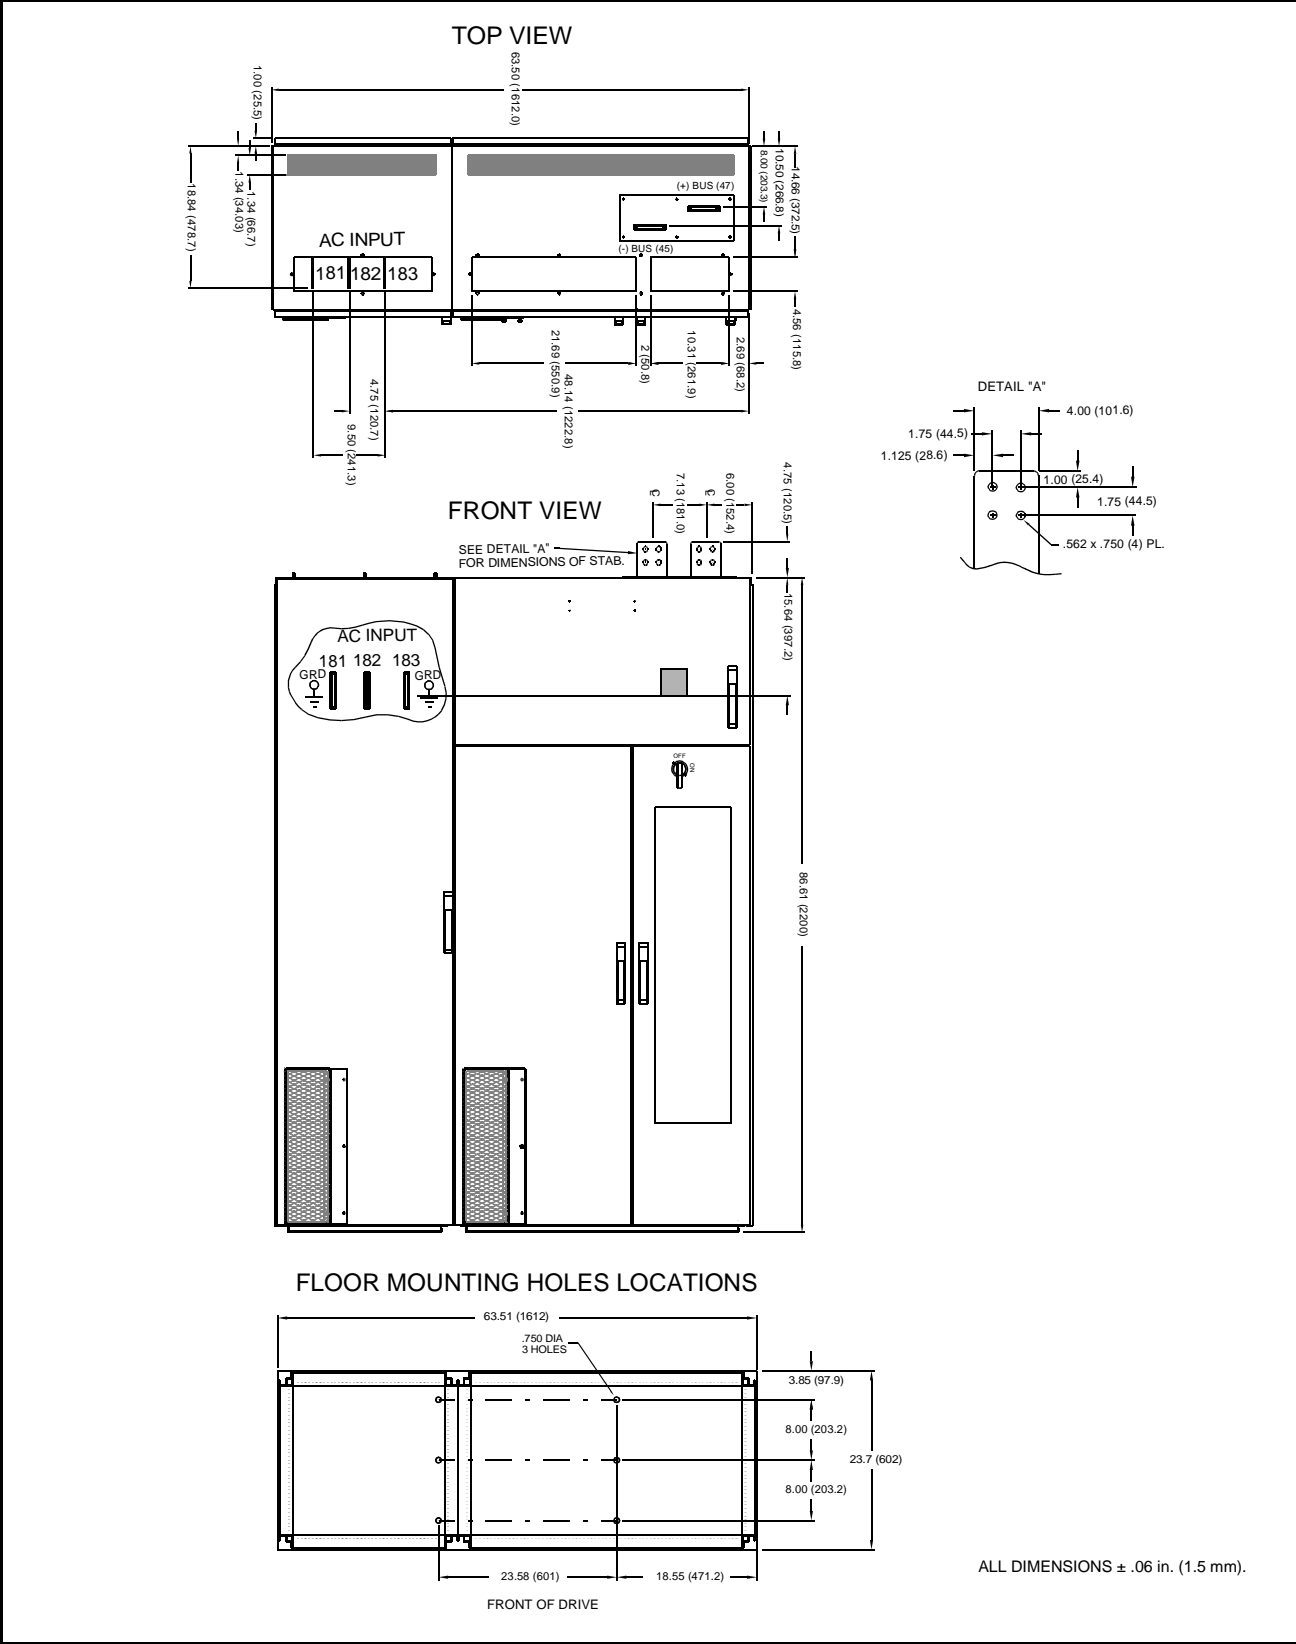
890A SB3000 Power Module Mounting Dimensions
